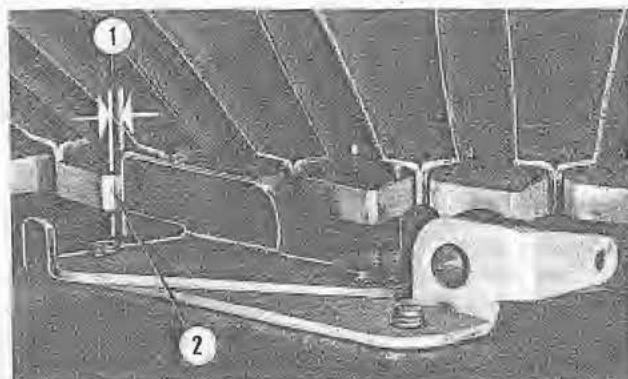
BACK STOP PAWL DEPTH ENGAGEMENT
